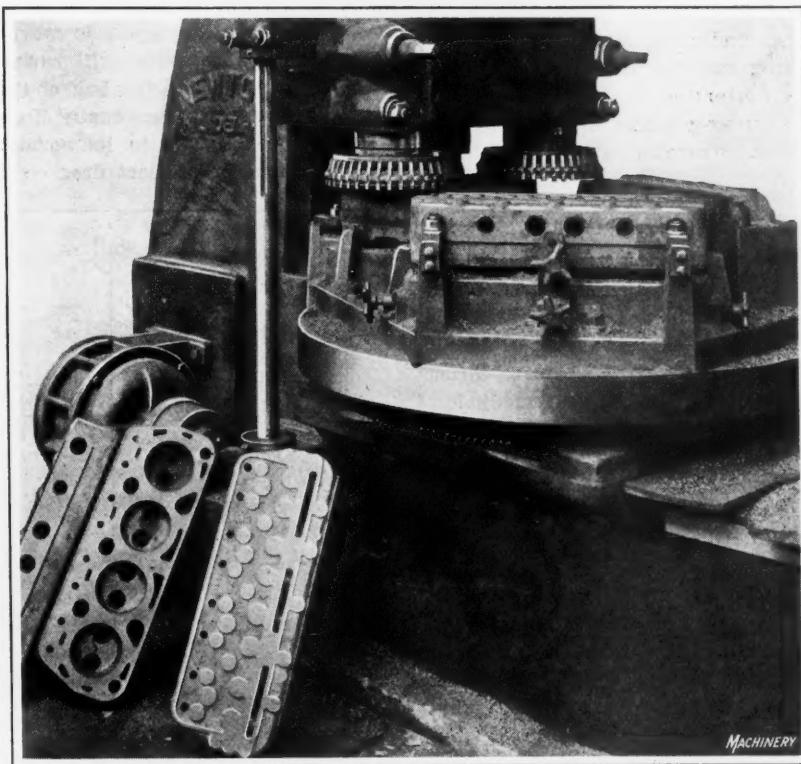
Milling with 14-inch Cutters, One Roughing and One Finishing, 40 Stellite Blades Each; Speed, 117 Feet per Minute; Table Travel, 12.8 Inches per Minute, or 0.010 Inch per Blade; Depth of Cut, 1/8 to 3/16 Inch; Surfaces per Grind, 519
